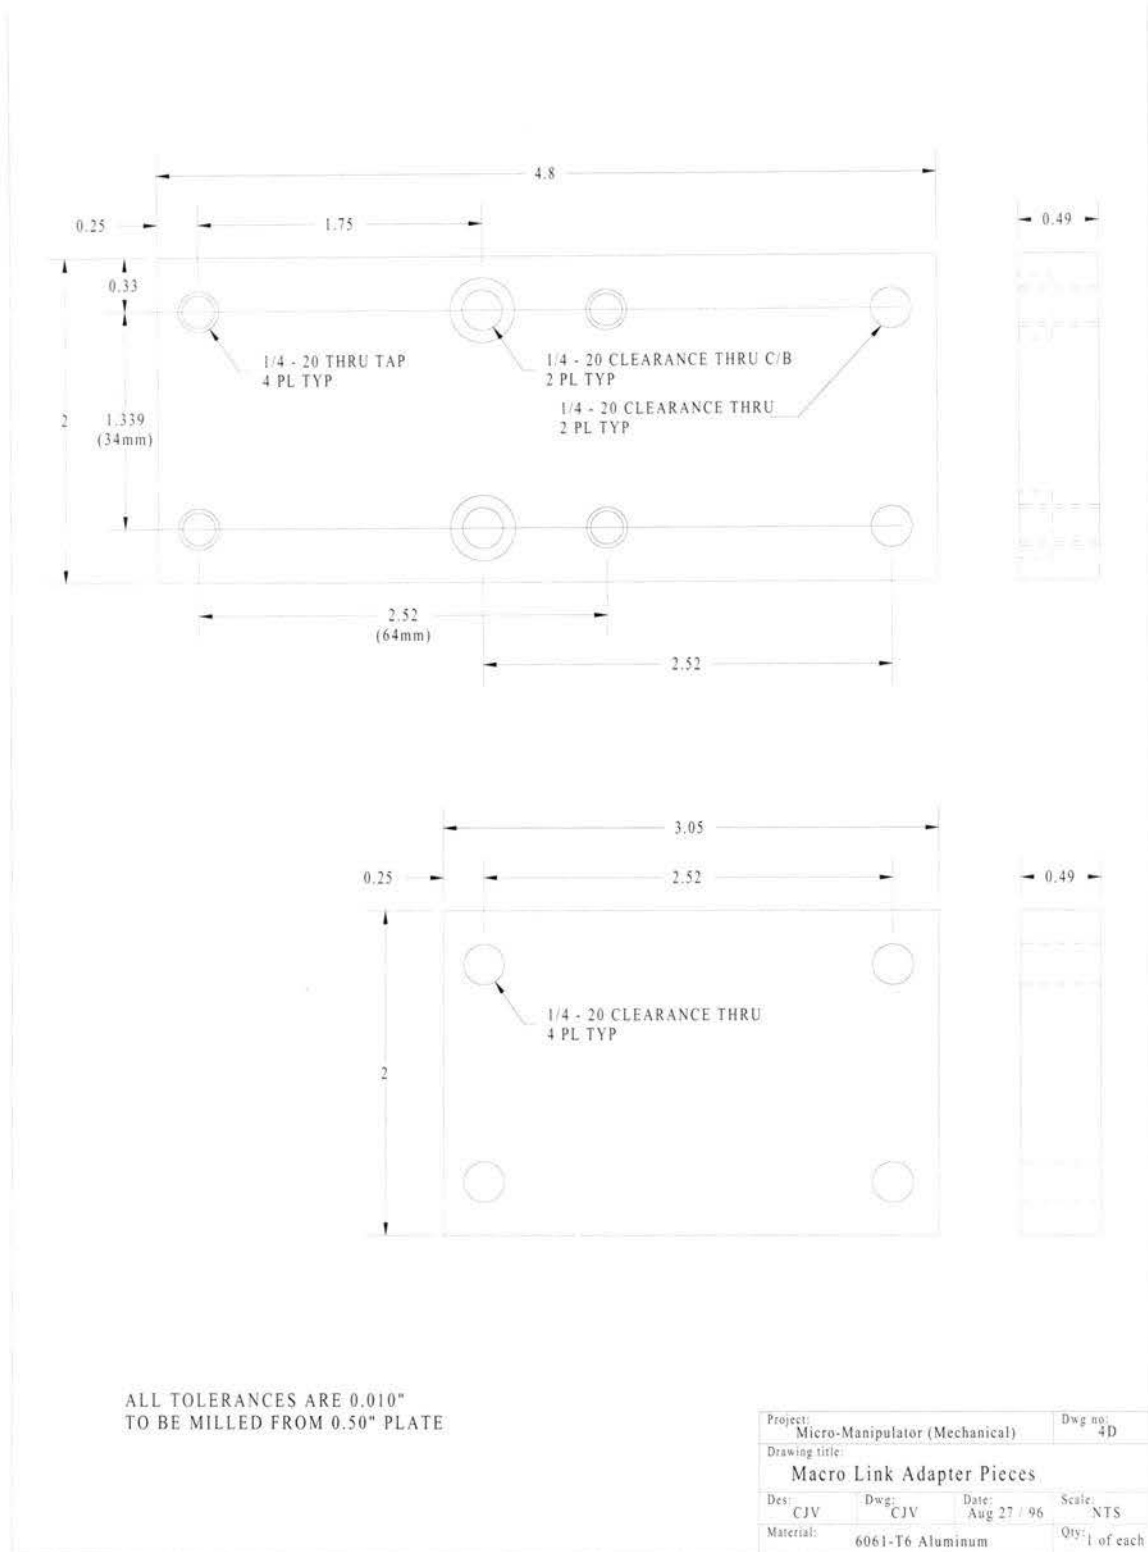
SARA Base Assembly: Macro-Manipulator Link Adapter
